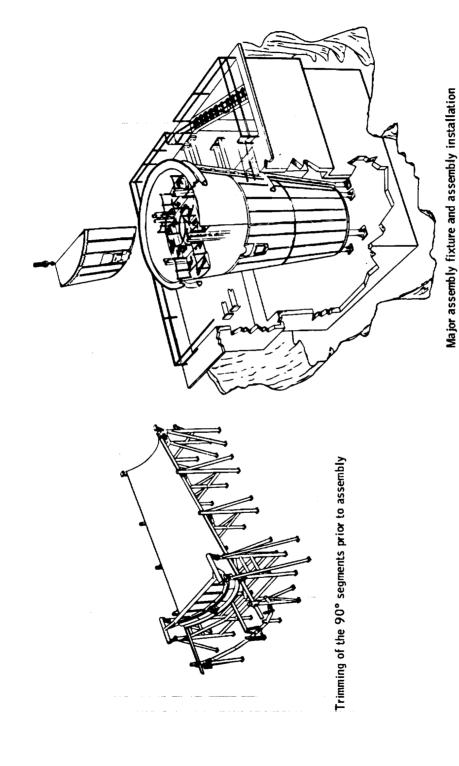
Spacecraft/lunar module adapter mating and assembly.
